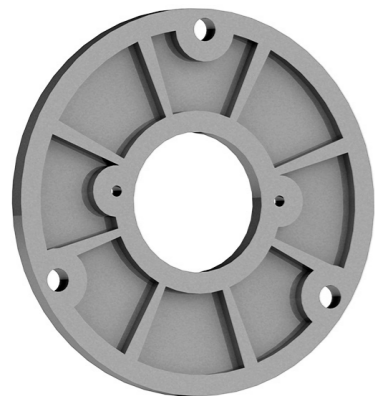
Sectional view of the cavities inside the damped armature plate
